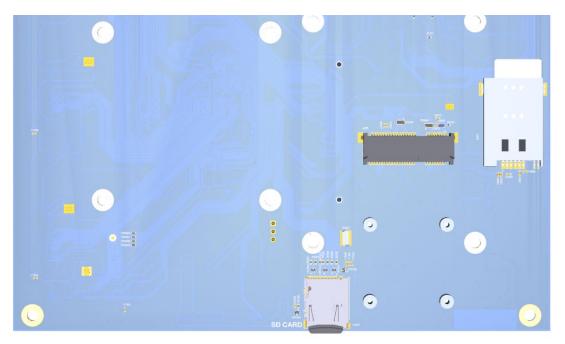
Mini-PCIe and Optional SIM Card Sockets
